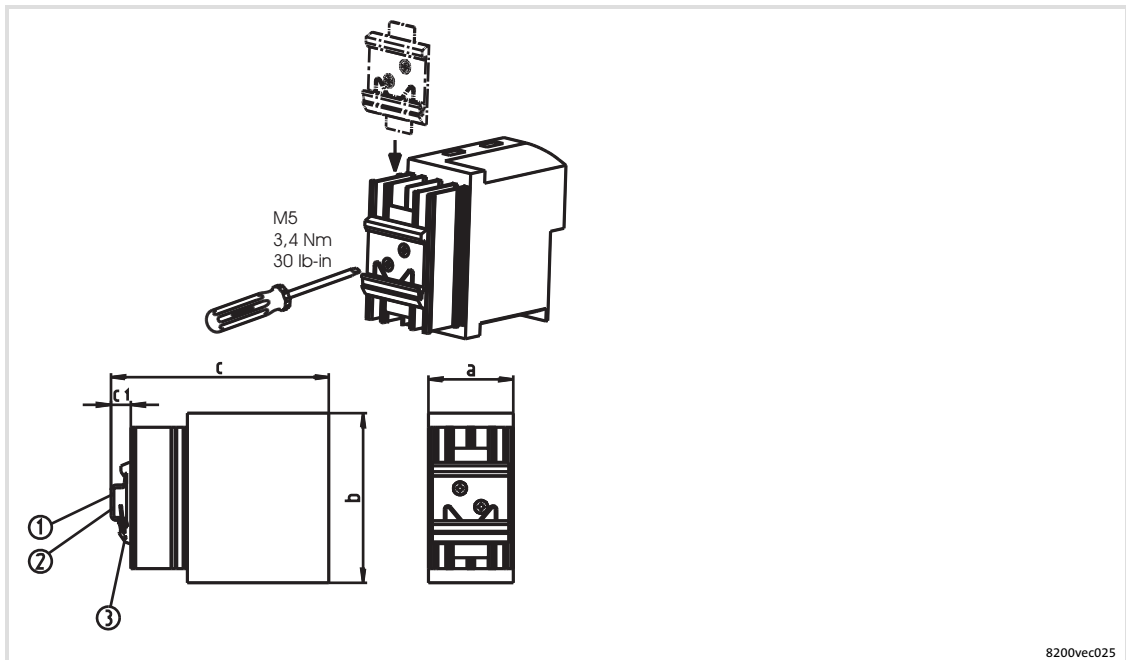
Installation on DIN rail 0.25 ... 2.2 kW
